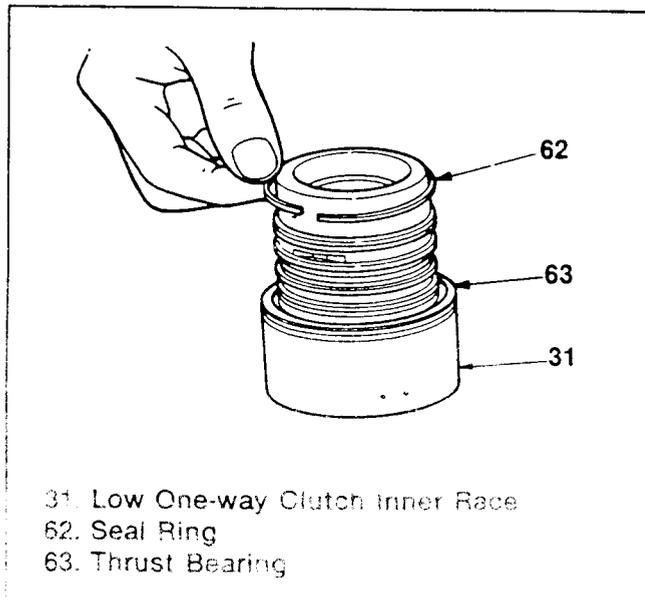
Low One-way Clutch Inner Race Seal Ring and Thrust Bearing Installation
